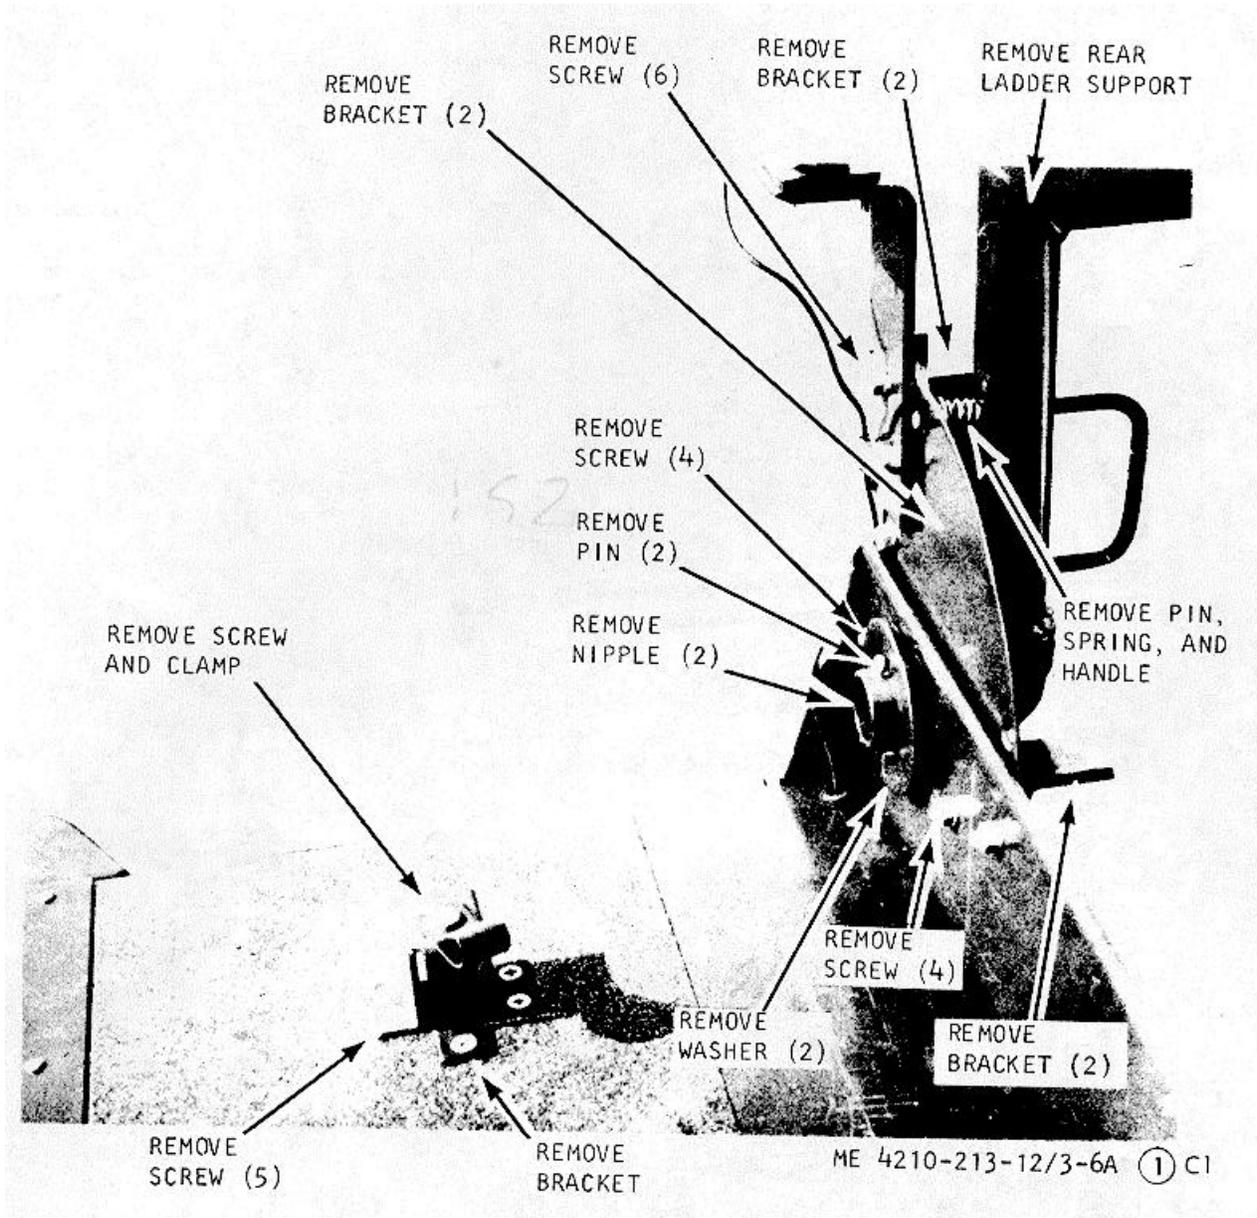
A. Ladder support assemblies, retainers, and fill door removal and installation for model FT-500 (sheet 1 of 2).
